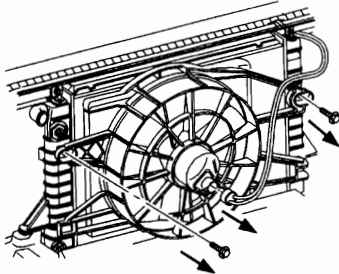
Remove the top retaining bolts from the fan/motor assembly
